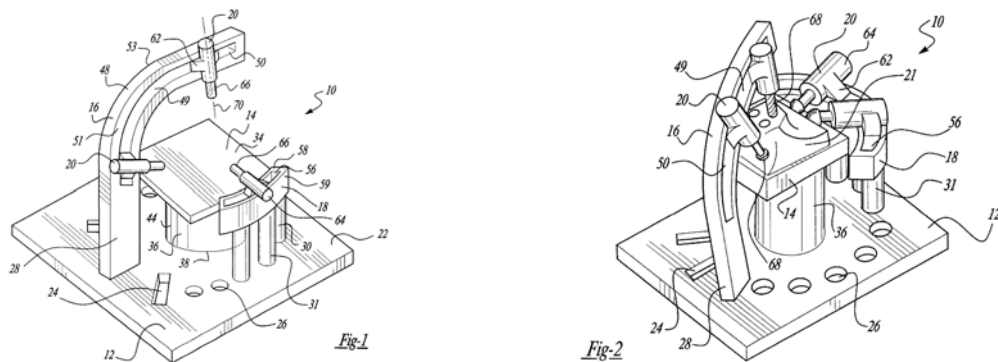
Diagram for a reconfigurable machine tool [28].
